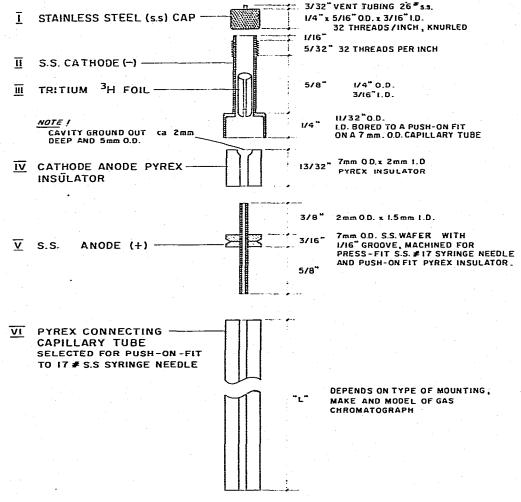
Exploded view showing design features of individual components of the modular cell electron capture detector.
